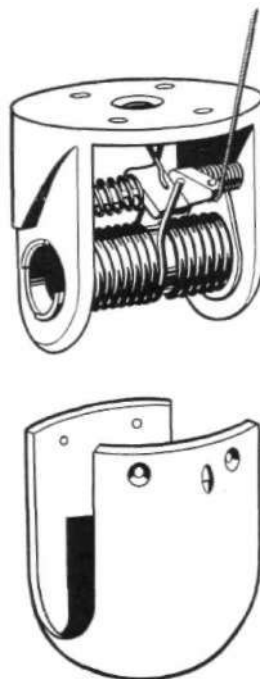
Hosmer elbow unit, without turntable or forearm saddle attachments.
